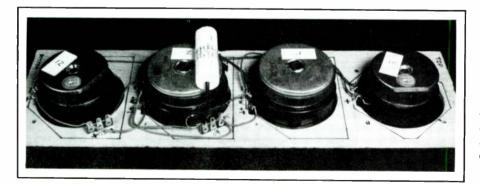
Assembled driver panel components with gasket material between flange and panel to help dampen driver frame vibration. Note the pencil lines to avoid final assembly parts obstruction.
